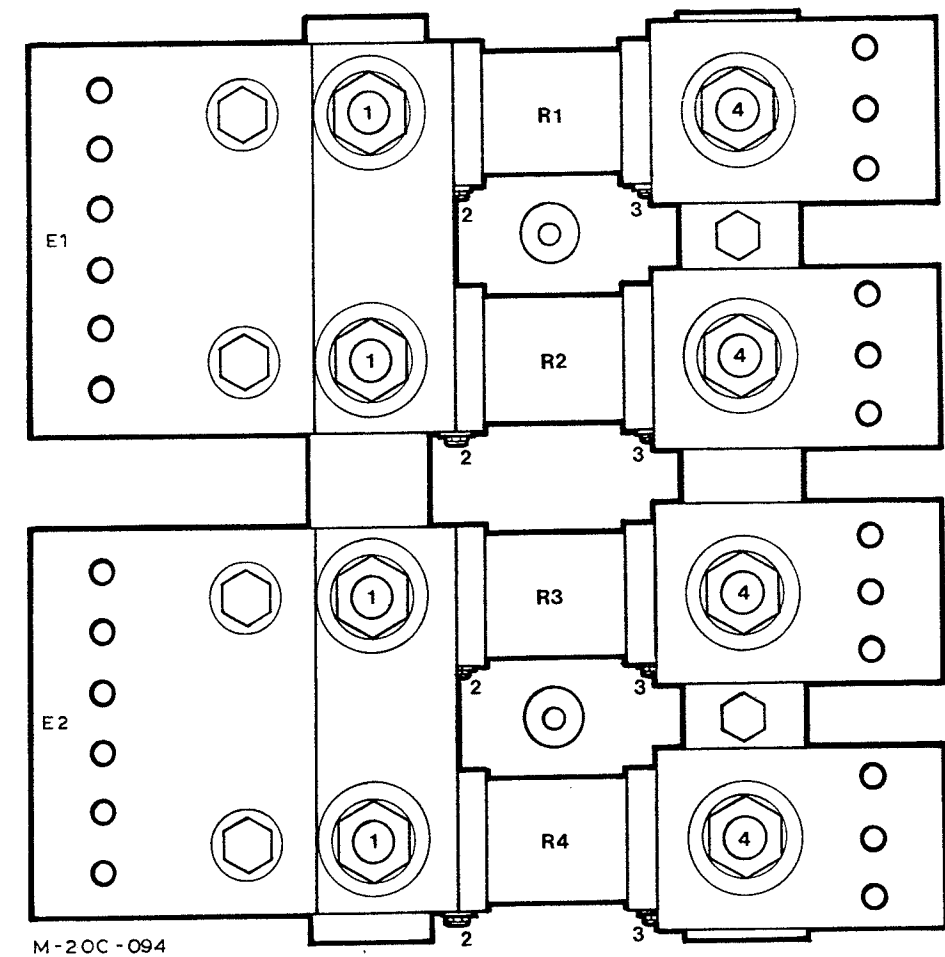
Assembly Detail - Current Shunt Resistor Assembly (Top View)
